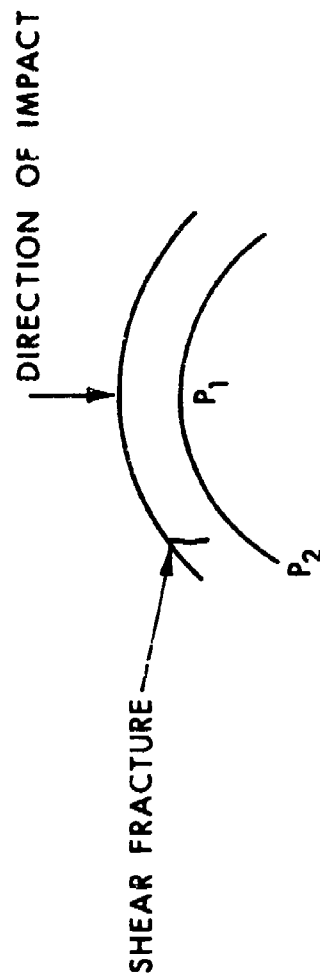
Schematic Showing Location of Shear Fracture Relative to Direction of Impact
